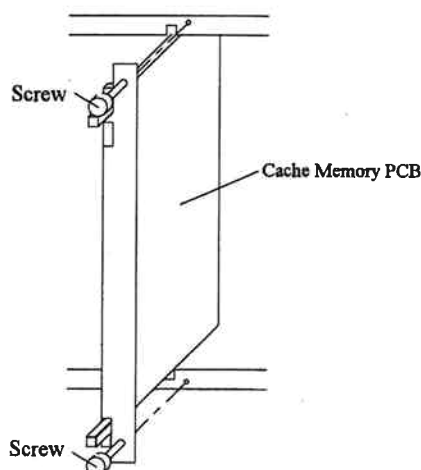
Removal of the Cache Memory PCB
